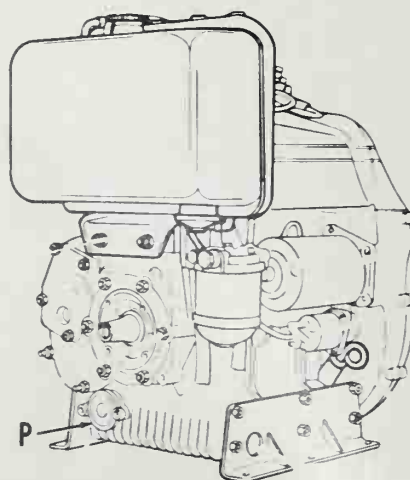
Remove oil pickup (P) for access to internal oil filter.
